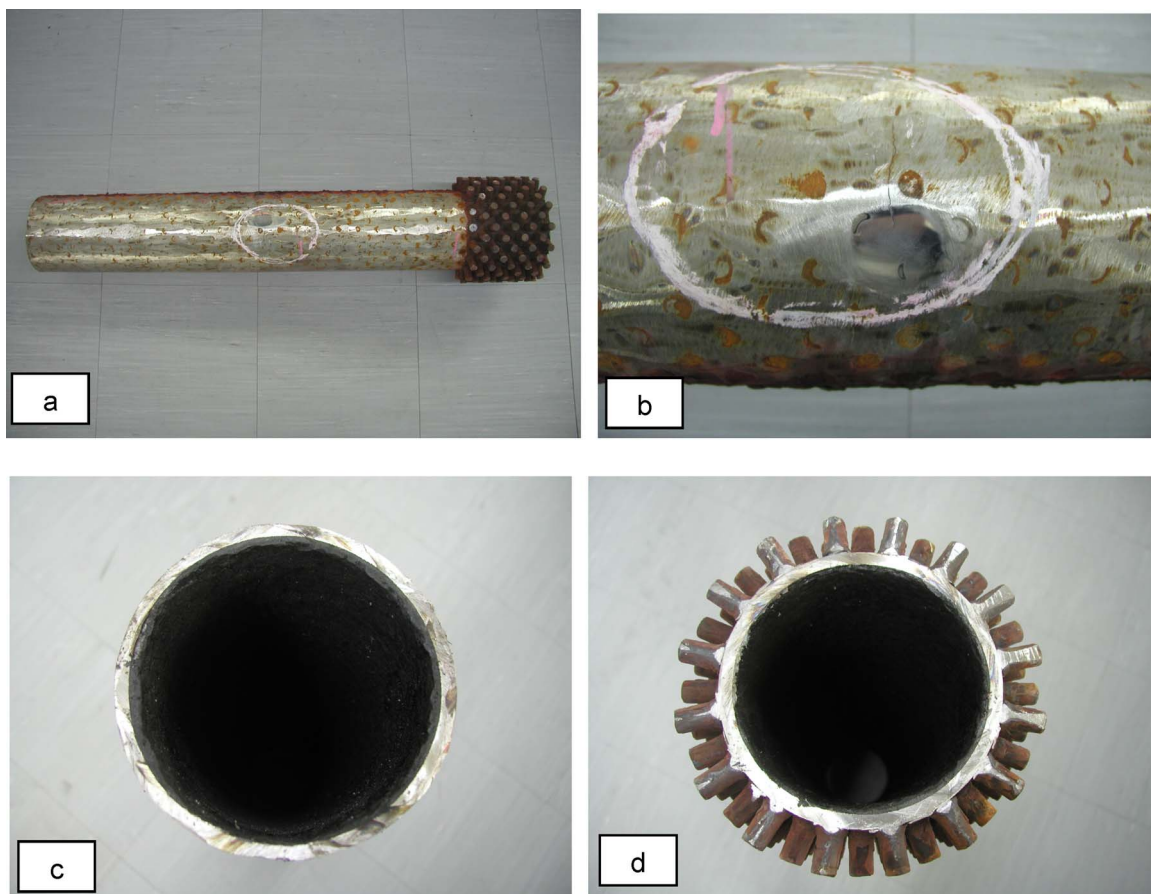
Camera photographs showing (a) as-received tube section; (b) circumferential crack seen after removal of studs; (c) deposited black layer on internal surface; and (d) stud portion of tube.
